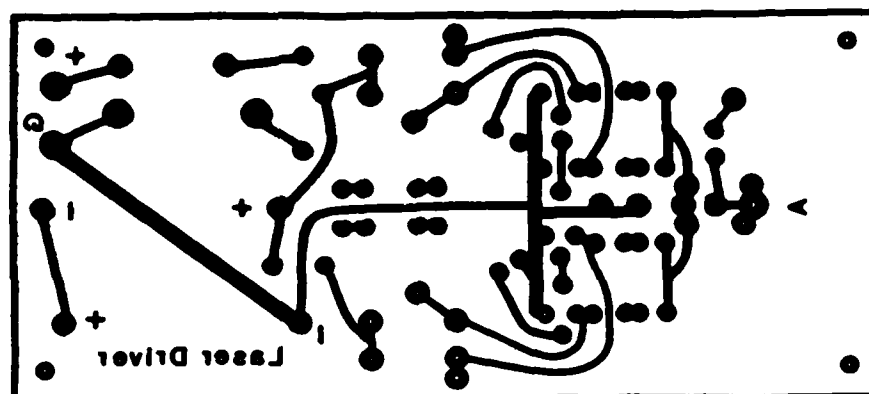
Soldering side layout of the pulsed laser diode driver board.
